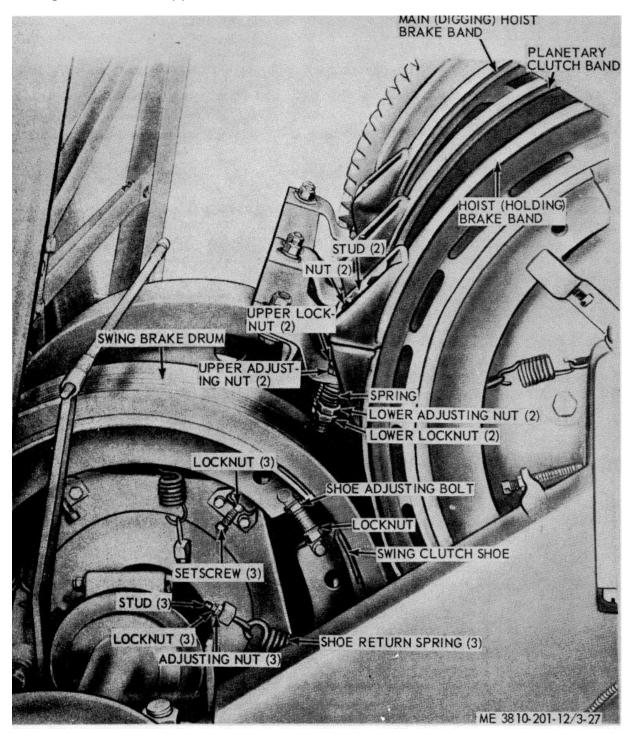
Swing clutch shoe lining wear adjustment and positioning of hoist drum clutch and brake bands.
